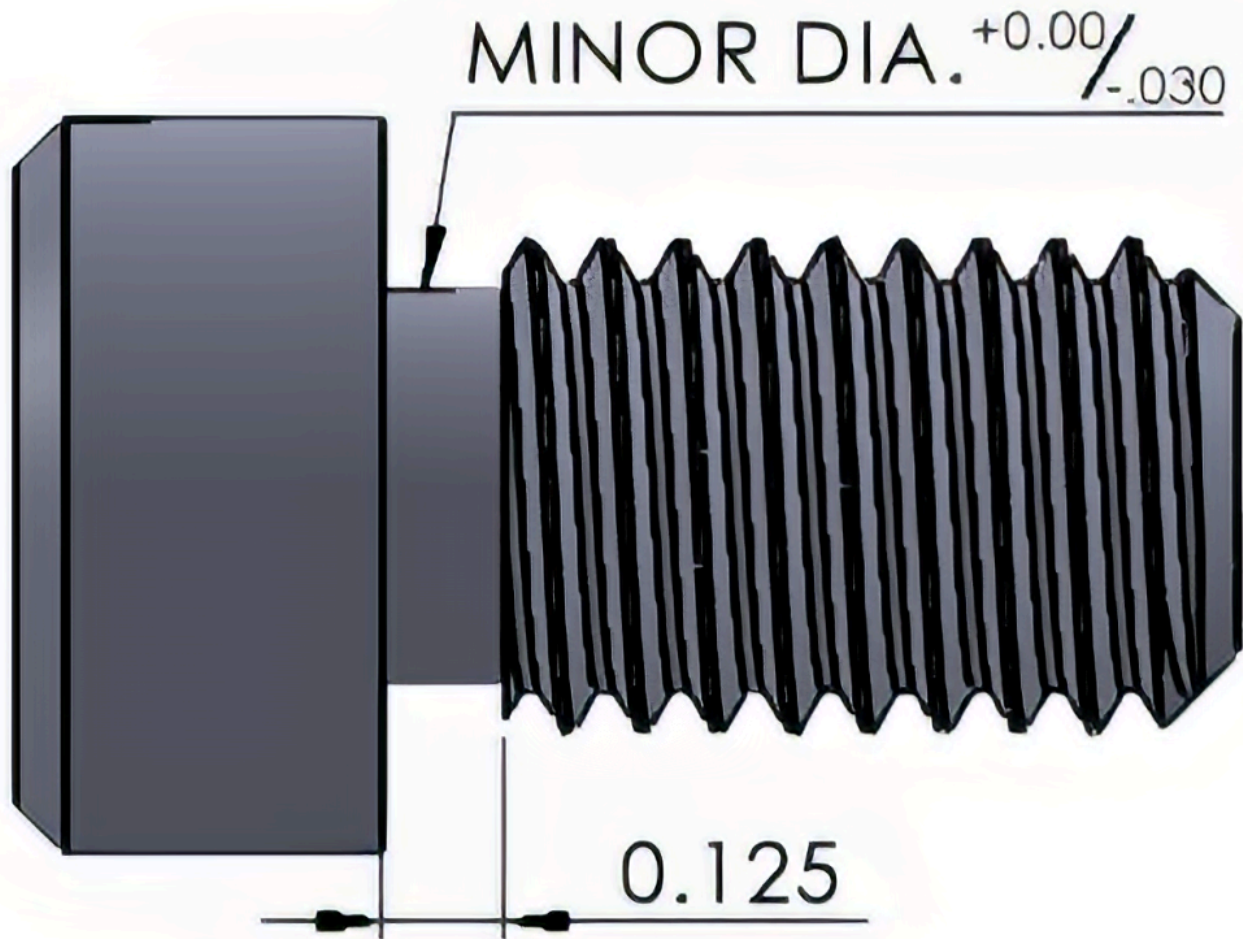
The neck used on threaded components is smaller than the minor diameter.
